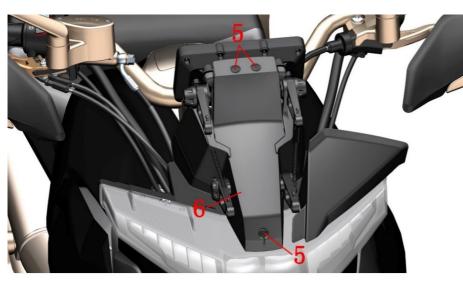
front fork		Windshield bracket component	CHK	(0)
